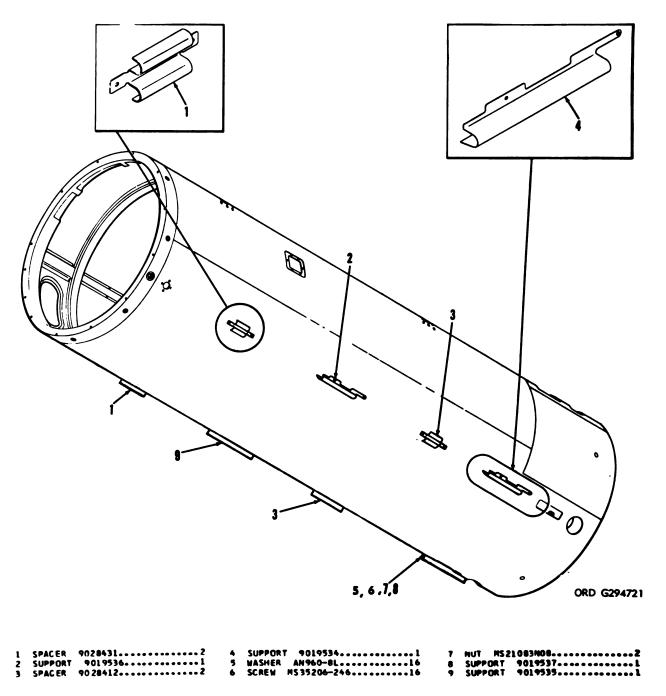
EQUIPMENT INSTALLATION, ENGINE SECTION /9028467/
